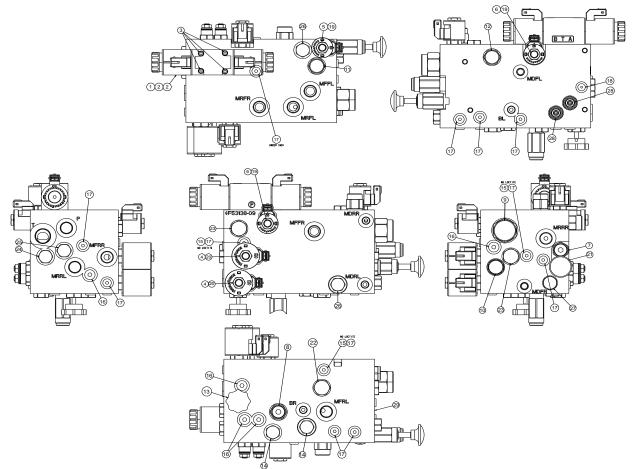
Hydraulic valve block drive of SL26/30SL
